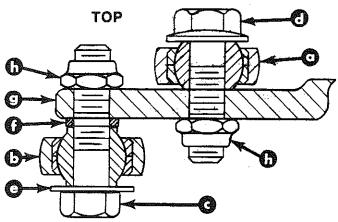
Ride-Guide Steering Cables Installed on Engines
